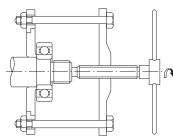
Removal of Inner Ring Using Withdrawal Tool (1)
